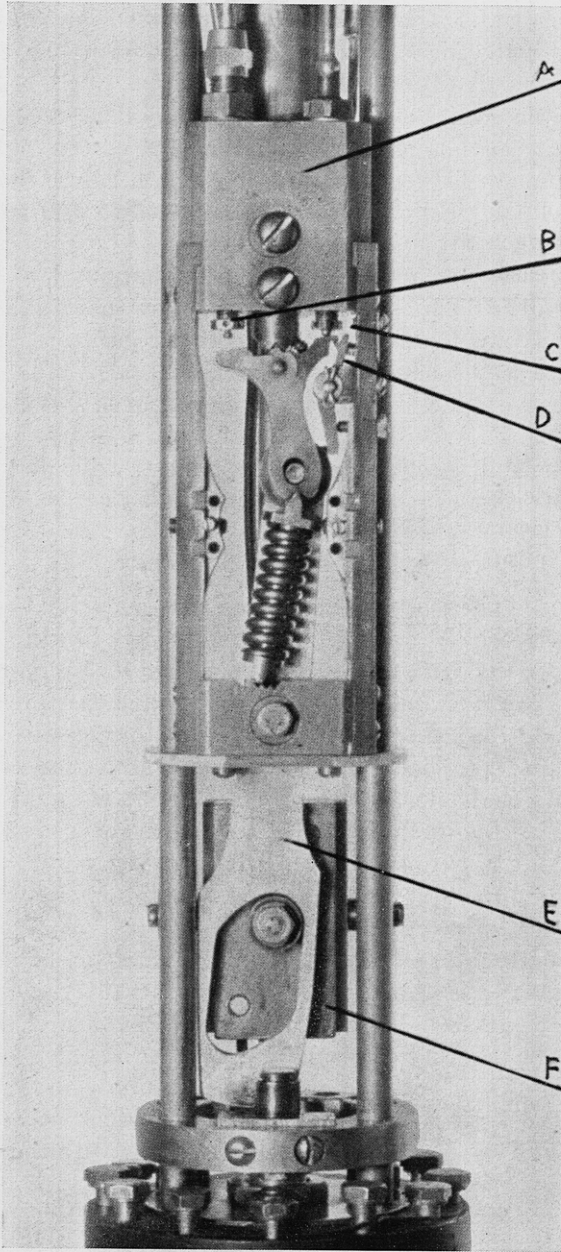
Liquid-oxygen injection pump. Valve mechanism at beginning of power stroke. A, valve block; B, exhaust-valve push rod; C, inlet-valve push rod; D, latch to hold inlet valve open until loaded spring mechanism is just past the equilibrium position in the direction of opening the exhaust valve; E, cam arm at beginning of power stroke; F, roller block rigidly fastened to piston rods.
